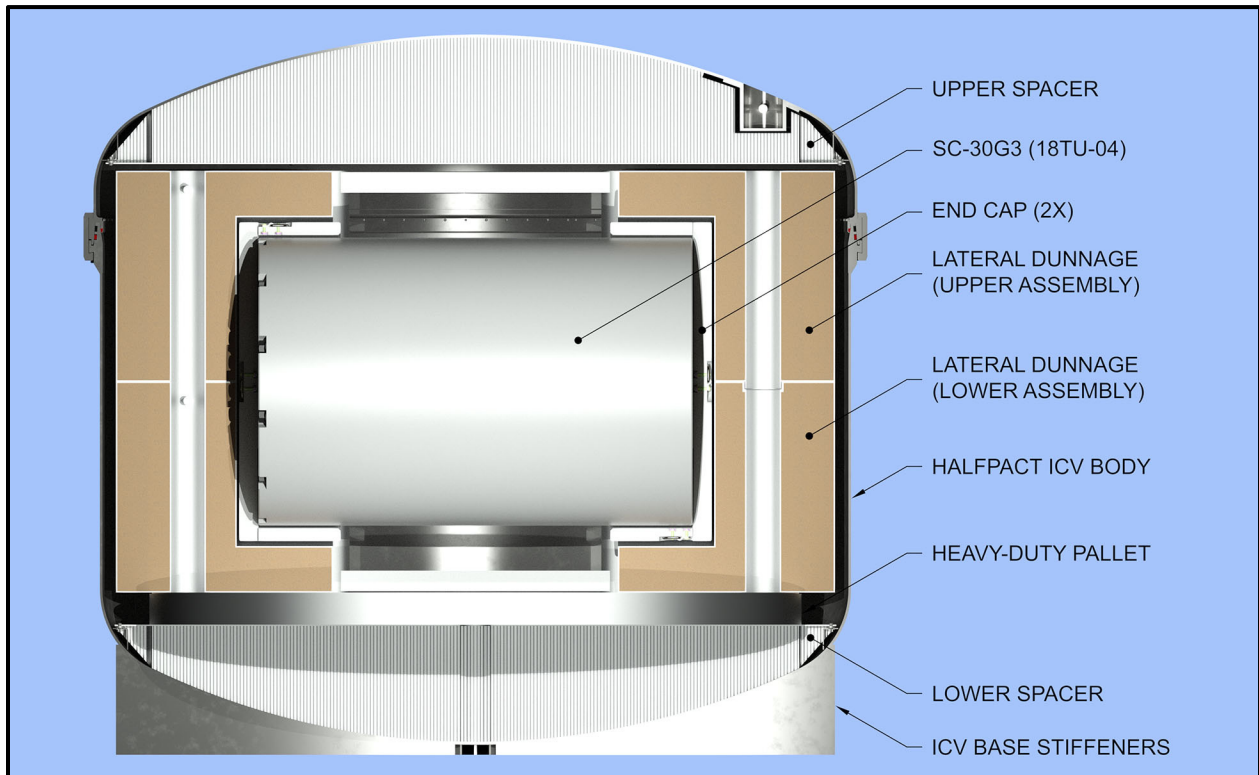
SC-30G3 Payload Assembly in a HalfPACT ICV
